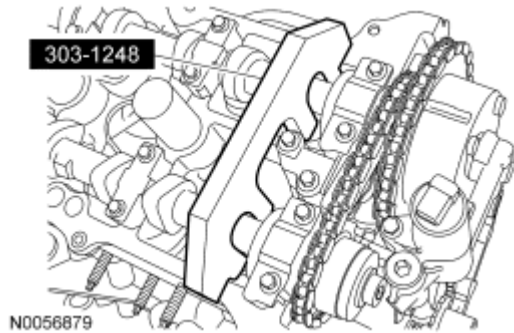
Installing Special Tool (303-1248) Onto Flats Of RH Camshafts
